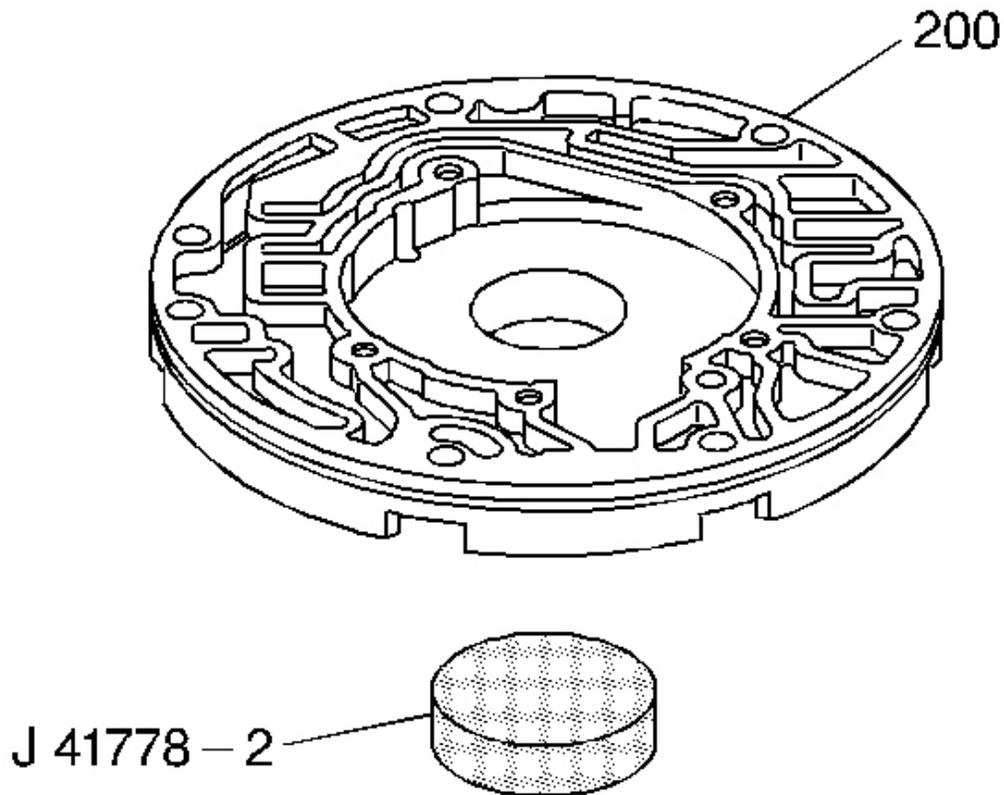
Using J 41778-2 To Ensure Proper Bushing Depth
